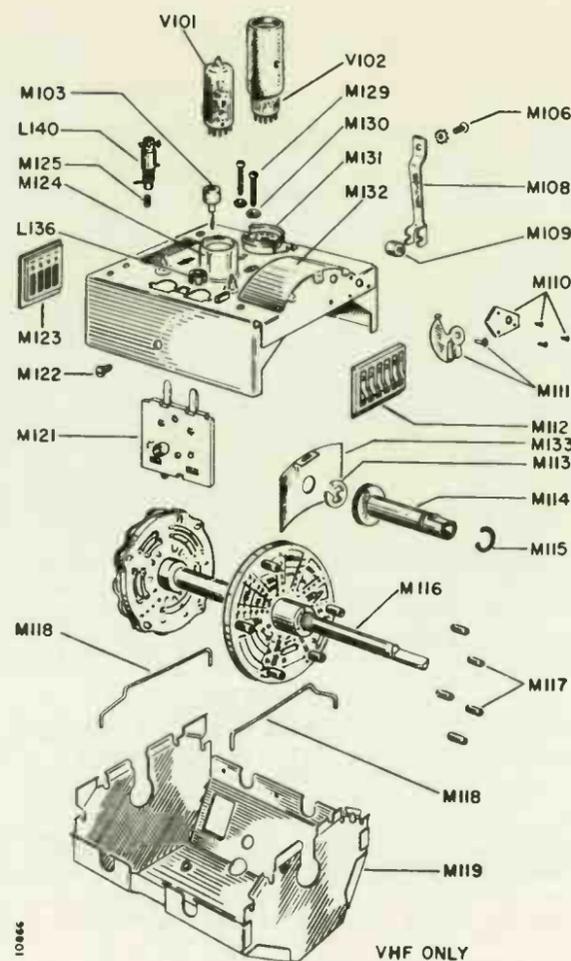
Exploded View of VHF Tuners 94E144-13, -19, -24, and -26.
